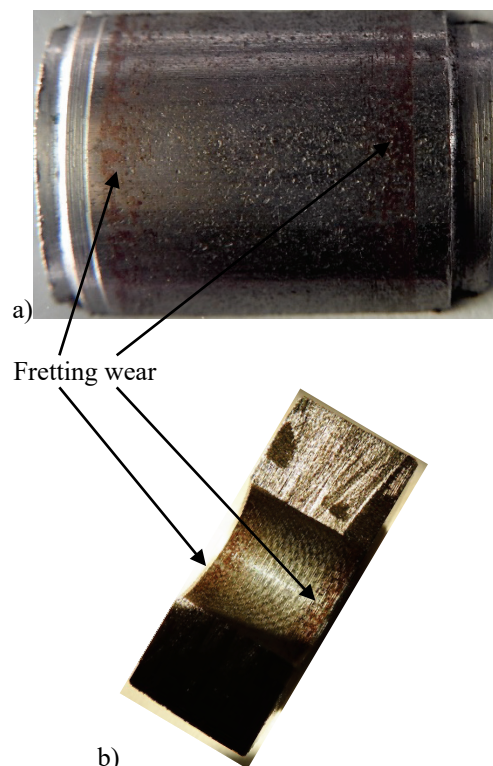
The image of fretting wear at the surface of the shaft (a) and sleeve (b)
